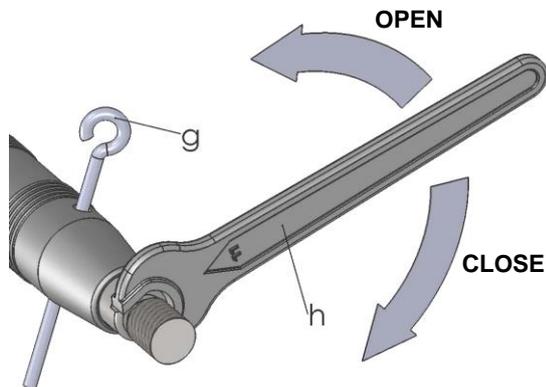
Tool change with collet ZG 1 / ZG 1a
